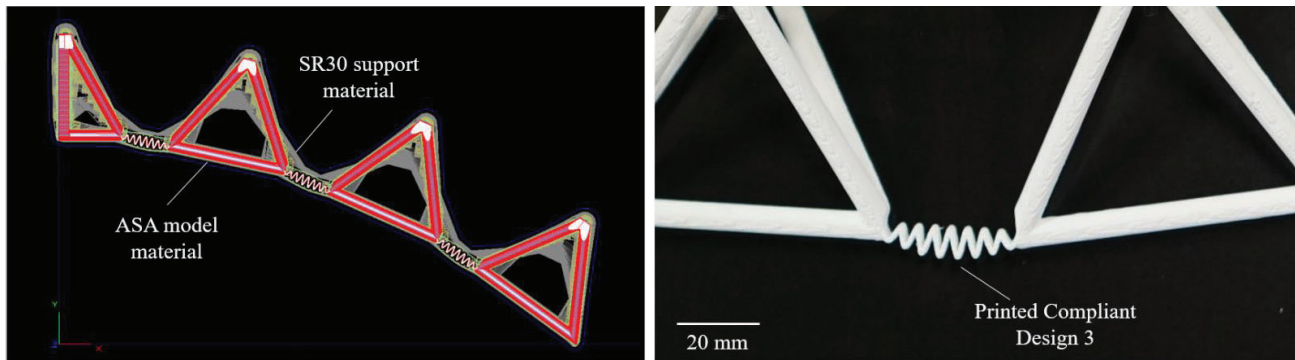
3D printing of the actuator (a) Sliced model of the actuator before printing (b) Print results of CM Design 3
